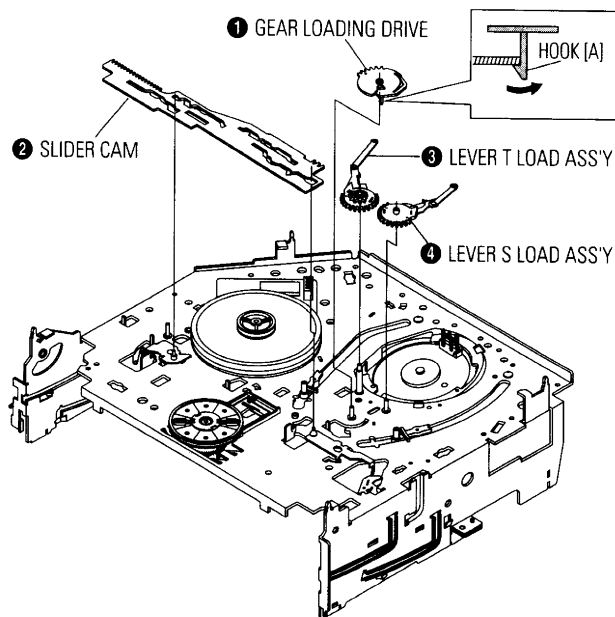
Gear Loading Drive, Slider Cam, Lever T, S Load Ass'y Removal
